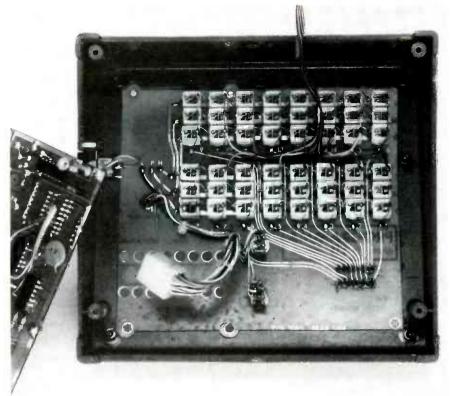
FOIL SIDE OF COMPLETED PANEL BOARD shows connections to jacks and board, and illustrates routing of wires and cables.
